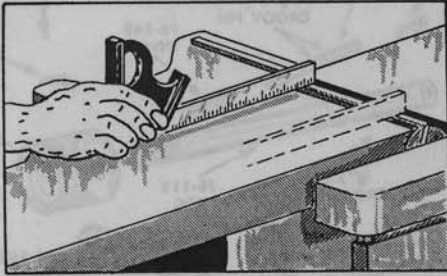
Jointer blades should be checked regularly for alignment to maintain absolute accuracy.
